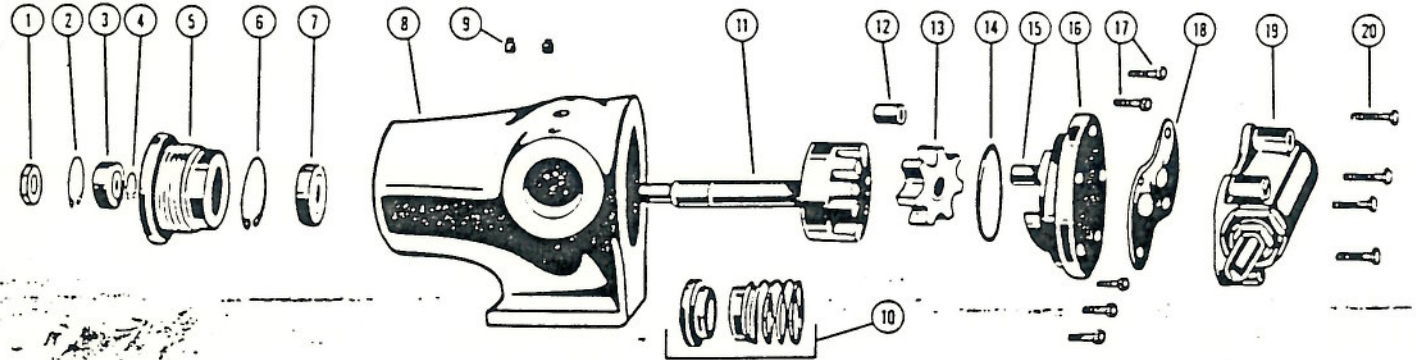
EXPLODED VIEW GG, HJ, HL195 PUMPS
